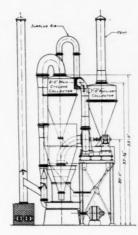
Grinding equipment with flue gas generator for introducing inert gas to prevent explosion
